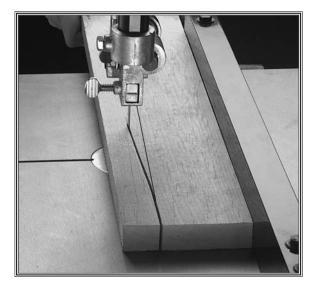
Typical bandsaw with excessive blade lead during a rip cut.
